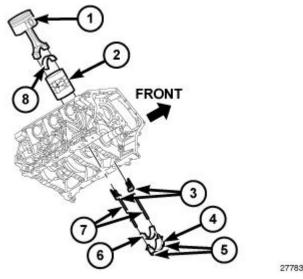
Piston, Connecting Rod Cap, Bolts, Plastic Guide Plates & Guide Pins Courtesy of CHRYSLER GROUP, LLC
